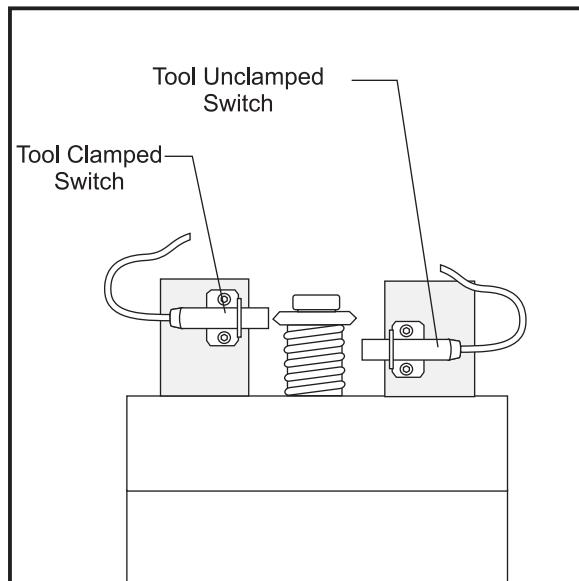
Tool Clamp / Unclamp Switches.
